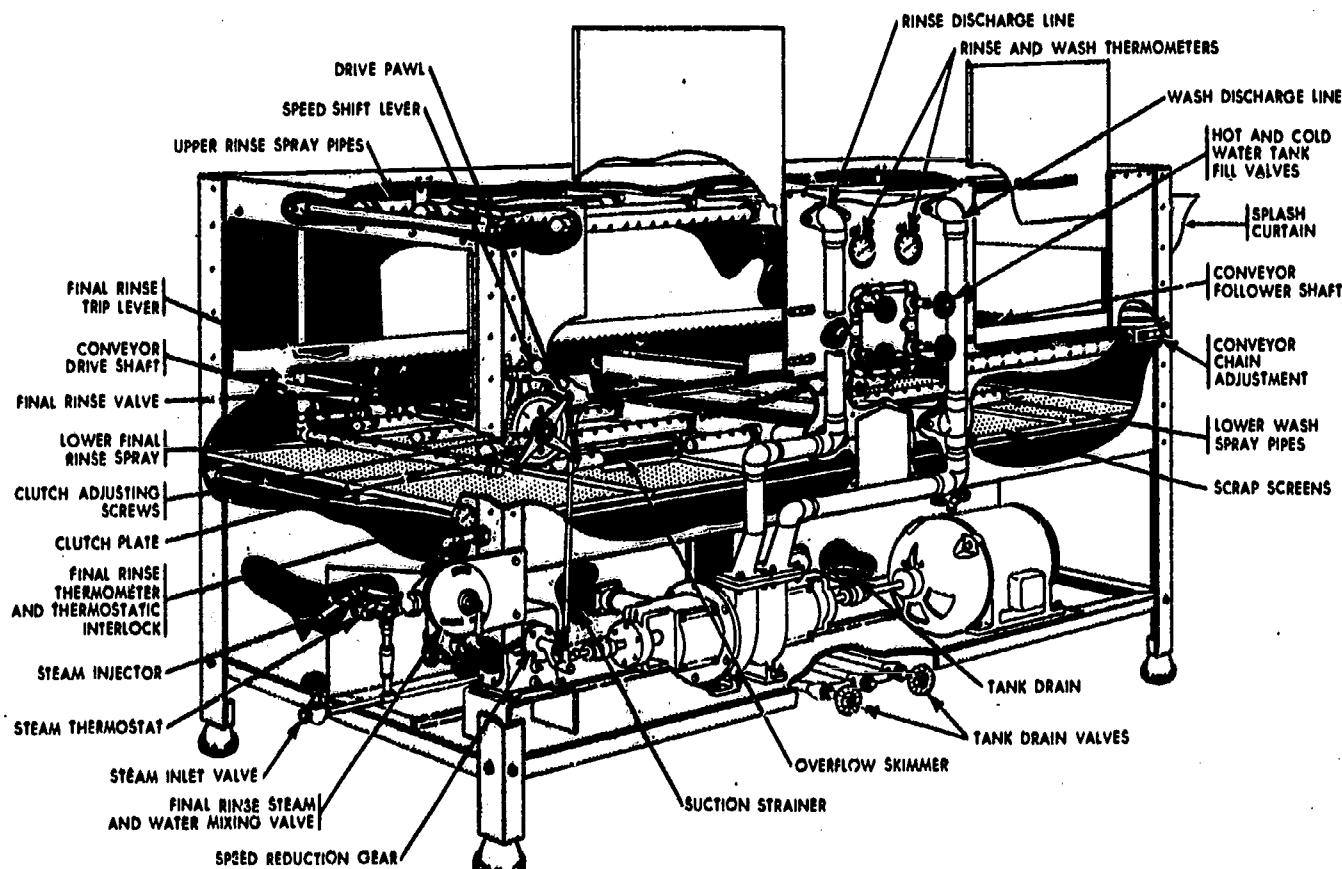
Cutaway view of double-tank automatic dishwasher.
